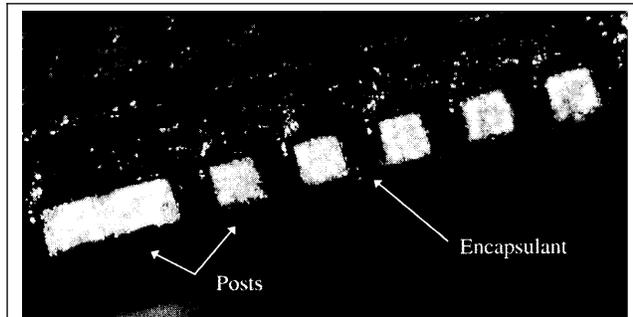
Close-up Photo of MSMT Posts, Encapsulant and Bottom of the Chip
